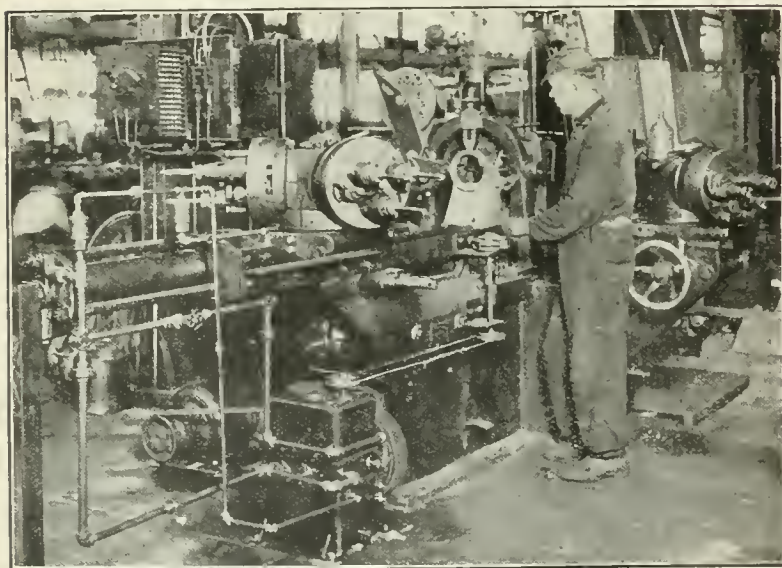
SPECIAL TURRET MACHINE EQUIPPED WITH HYDRAULIC FEED
